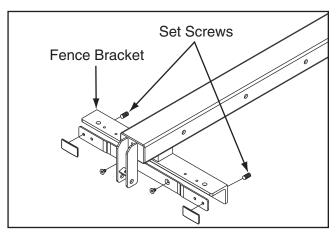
Location of set screws used to adjust fence parallelism and clamping pressure.
